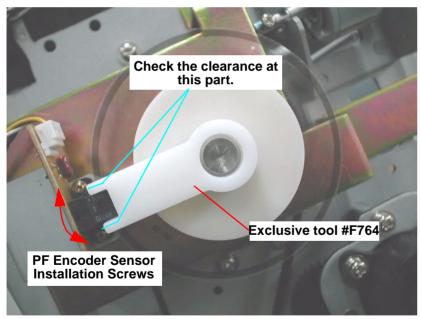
PF Encoder Sensor Installation Position Adjustment
